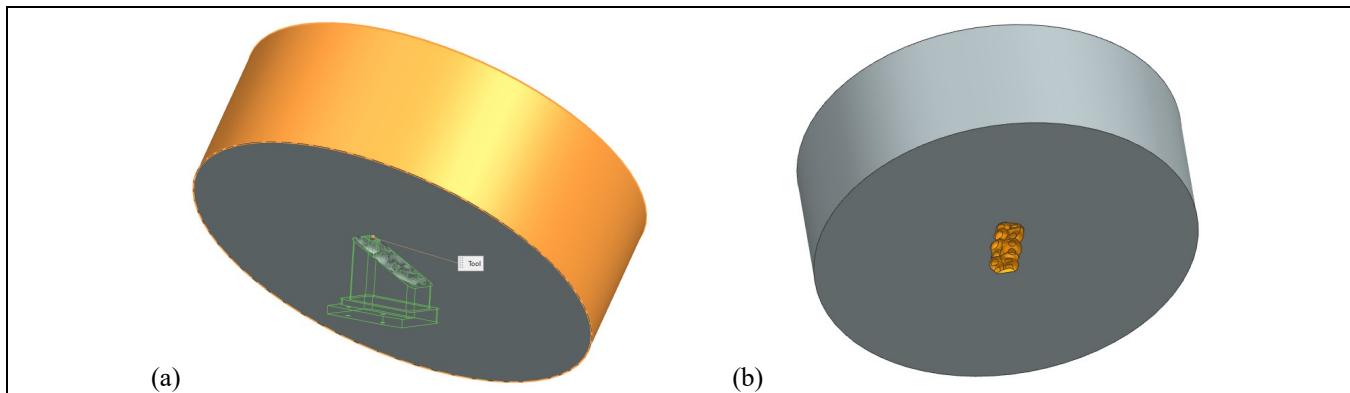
(a) Silhouette of maxilla teeth profile to create a (b) mould using the ‘assembly cut’ feature on Siemens NX.
